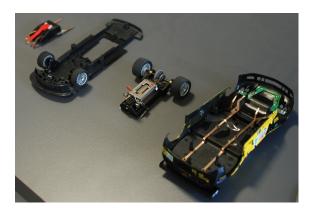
An SXC car disassembled showing the spring contacts that replace soldered wiring and PCB connector plugs.
